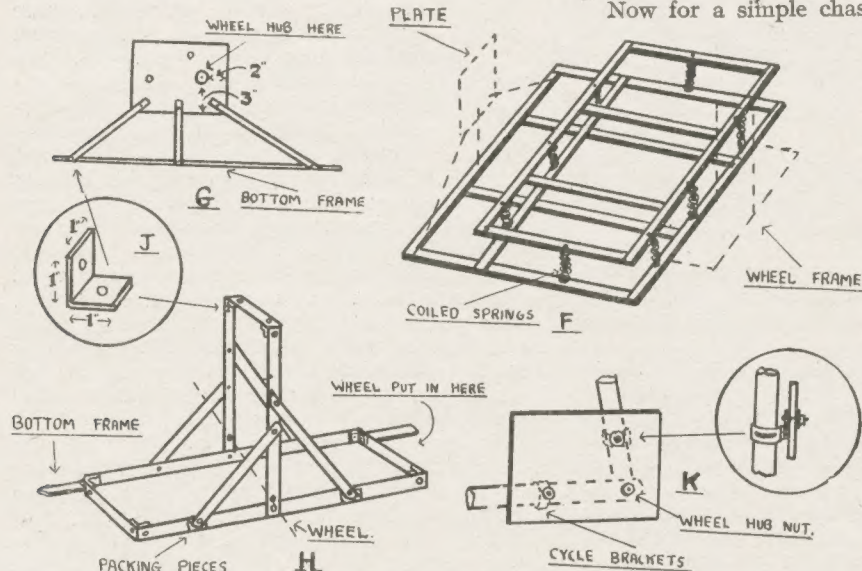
The chassis with the two frames (F). Plate strips (G). Wheel frame (H). A corner piece (J) and how to fix to cycle at (K).
